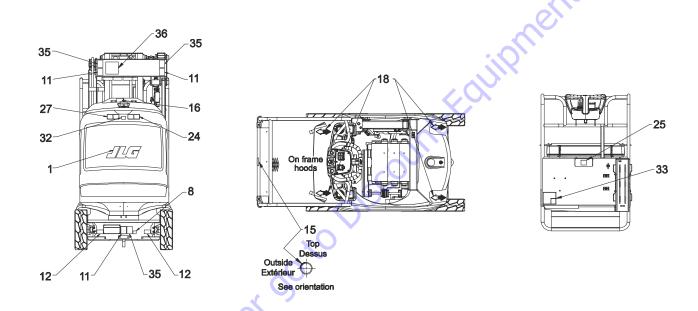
Decal Installation - 8E/20E All Markets - Sheet 2/3
